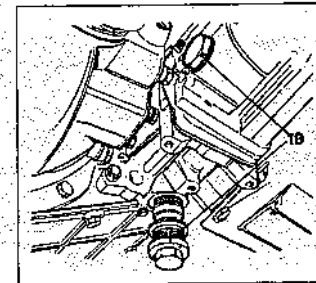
Drain plugs (19) on the transmission extension housing and transfer box (Sec 9B)
